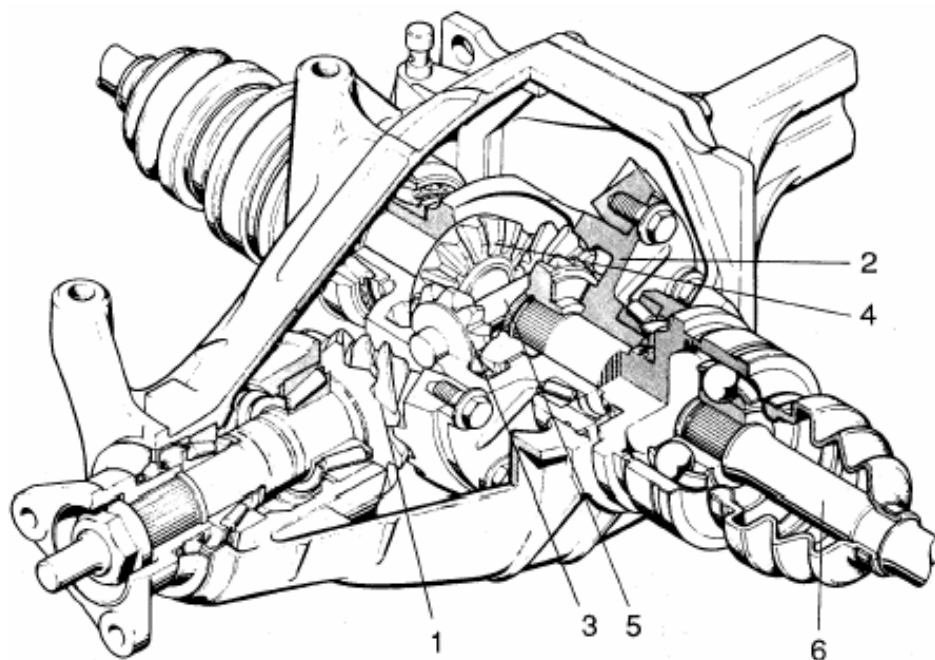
Non-locking Opel rear axle differential. 1 Bevel gear final drive; 2 Differential cage; 3 Differential bevel gears; 4 Axle bevel gears; 5 Differential pin; 6 Axle shafts
